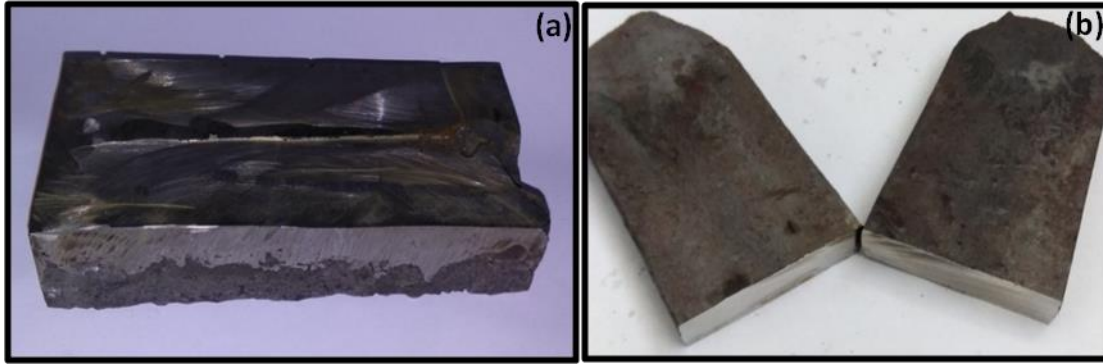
Actual photos of the steel specimen (a) before forging, and (b) after forging.
